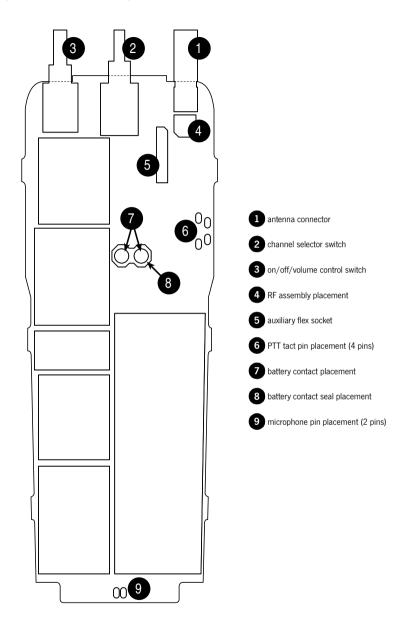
Top surface of PCB, which is visible only when the PCB has been removed from the chassis (Orca Elan or Orca Excel shown)
